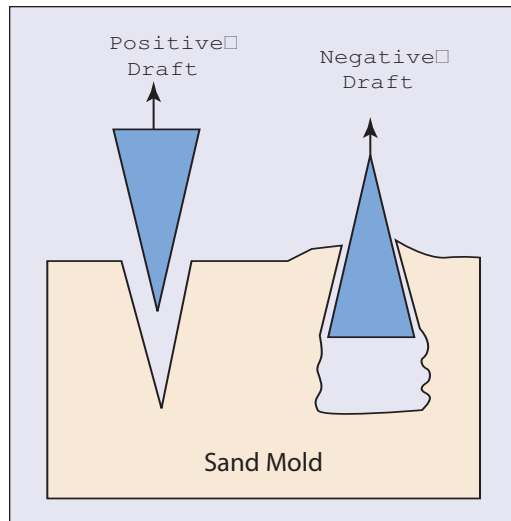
The positive draft (l) will enable the pattern to be extracted from the sand mold after compaction. If a pattern was constructed with negative draft (r), it would tear the mold apart during the pattern removal process and cause a defect in the casting.
